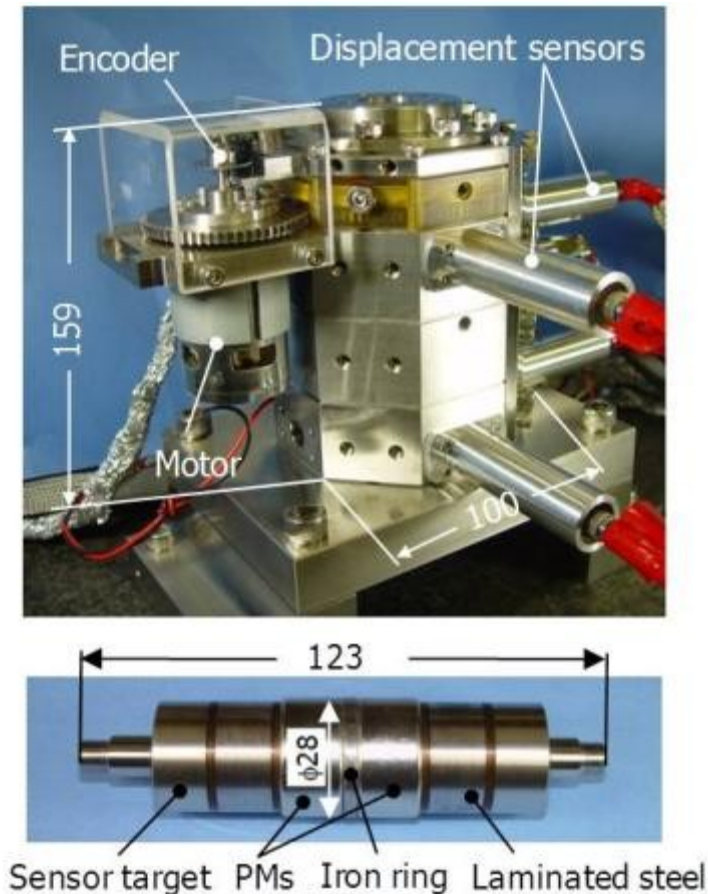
Fabricated prototype maglev electrode driving actuator and its spindle shaft
